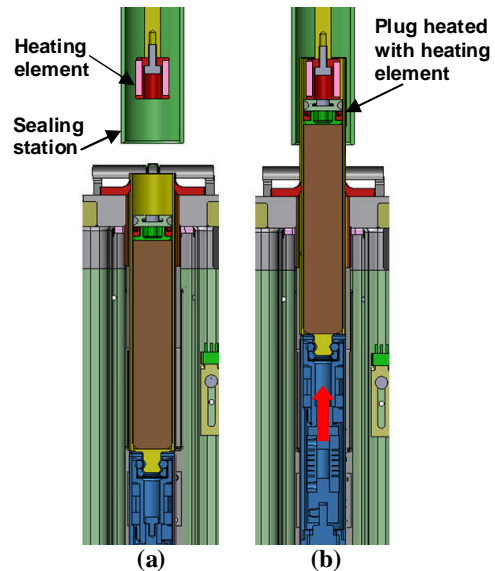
Sealing operation: (a) Plugged sample tube positioned under sealing station, (b) tube extended up to heating element and sealed.
